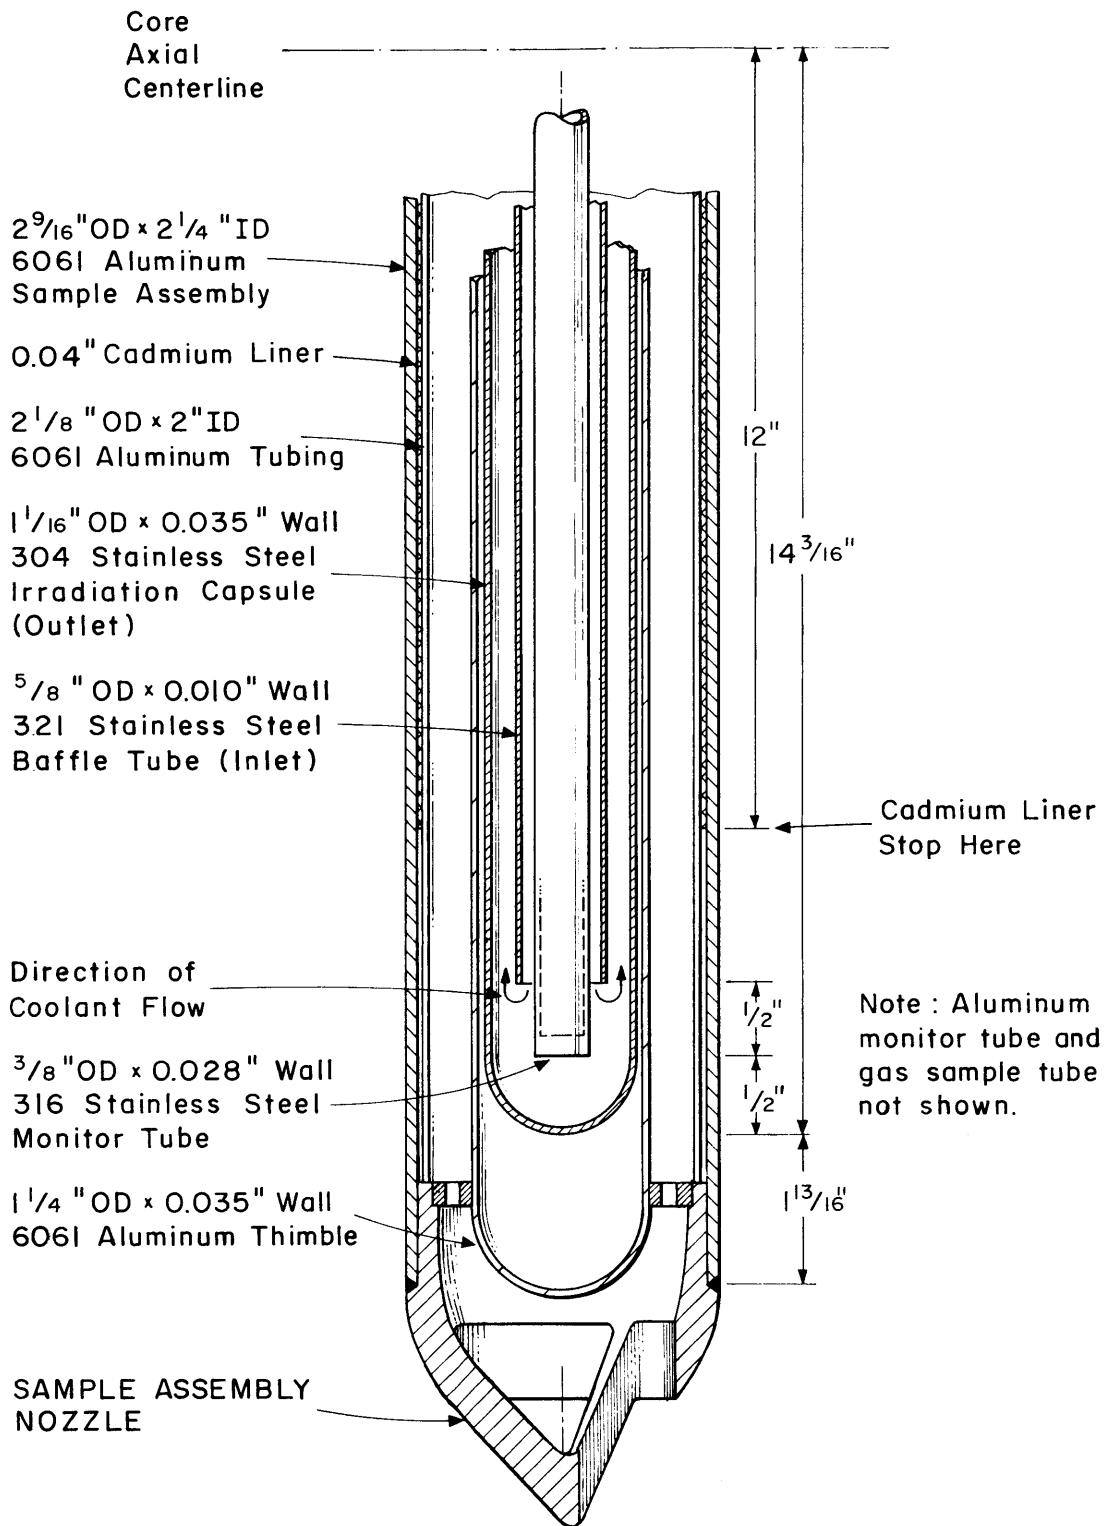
SIMPLIFIED ELEVATION CUT-AWAY VIEW OF LOWER END OF IRRADIATION CAPSULE OF IN-PILE SECTION No. 3 INSTALLED IN CADMIUM-LINED SAMPLE ASSEMBLY
